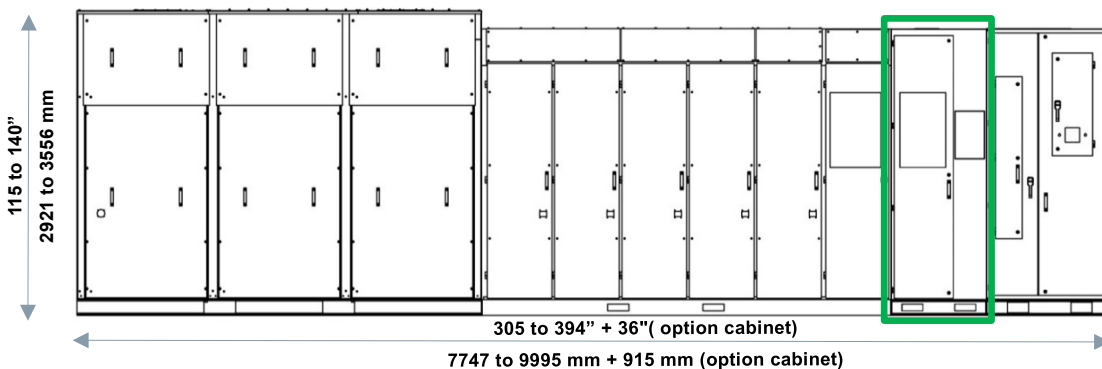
Drawing M represents a standard Perfect Harmony GH180 water-cooled drive layout: transformer cabinet, followed by cell cabinet, control section, output section and 48" standard cooling cabinet. The only difference will be number of cells: the drawing below shows 15 cell drive with 5 sections; 9 cell drive will only have 3 sections while 24 cell configuration will have 8 sections in the cell cabinet.
